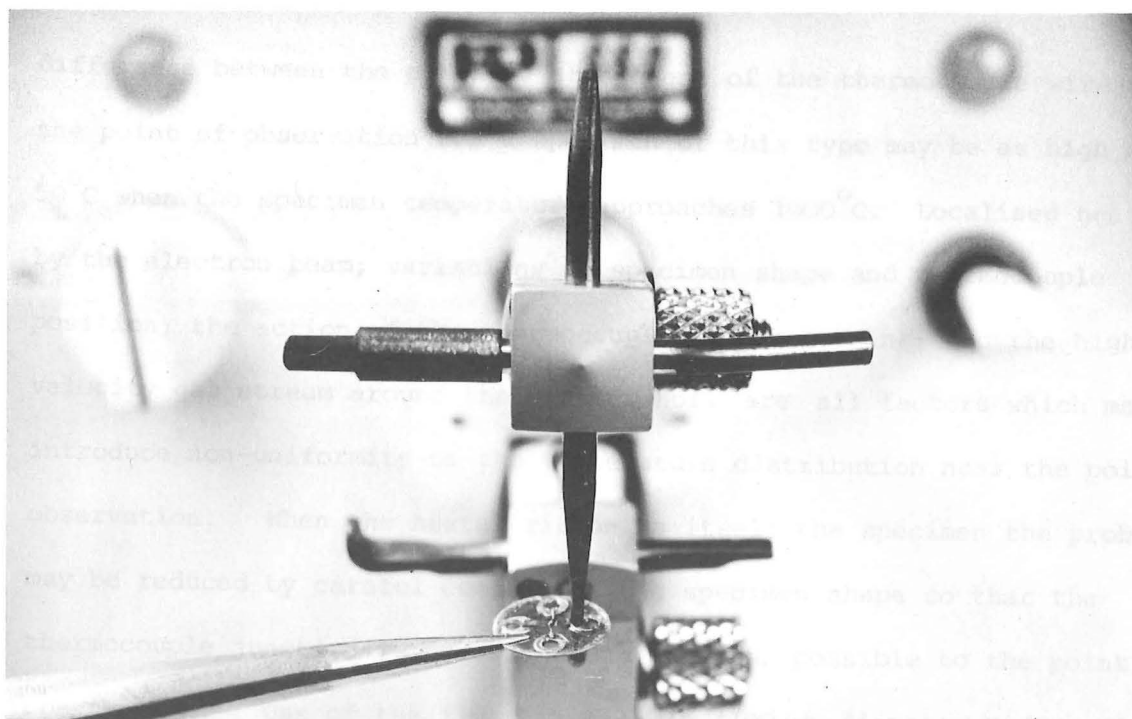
Construction of a specimen assembly by spot welding. (Scale 1.5 times full size.)
